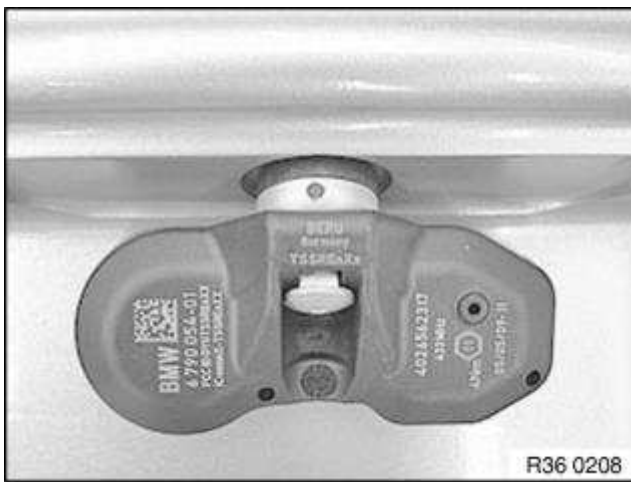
Make Sure The Square Head Screw (1) Fits Exactly In The Holder For The Electronic Wheel Module
